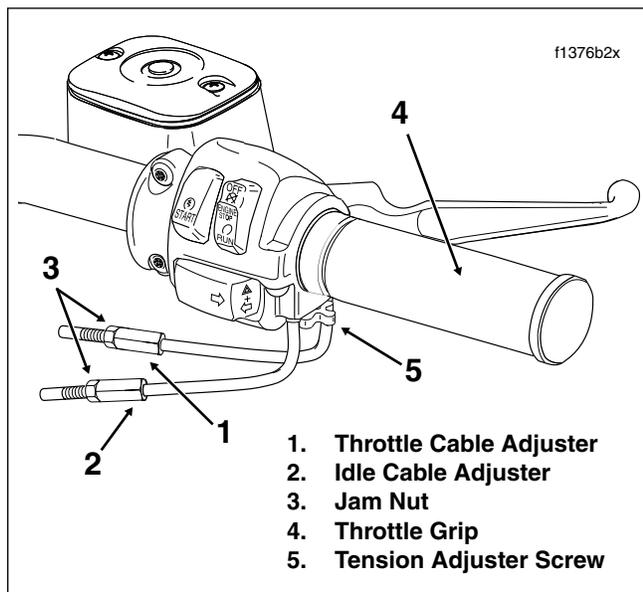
Throttle Cable Assembly - Throttle Side (FLHR/S)
